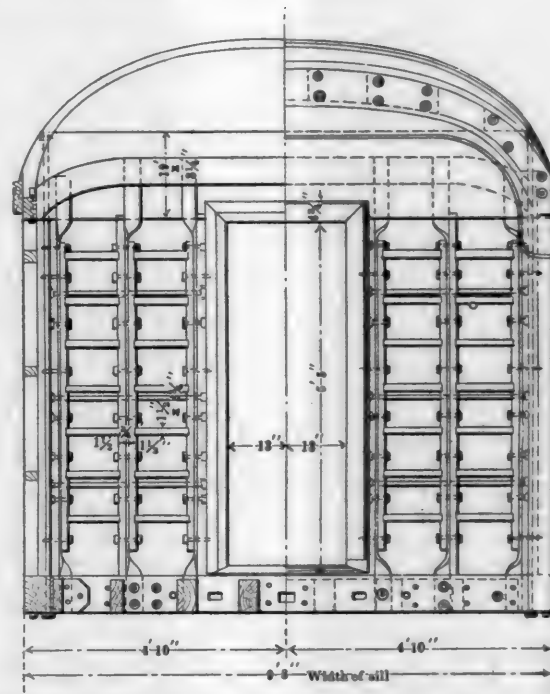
DETAILS OF LARGE END DOOR OF CAR FOR AUTOMOBILES.
